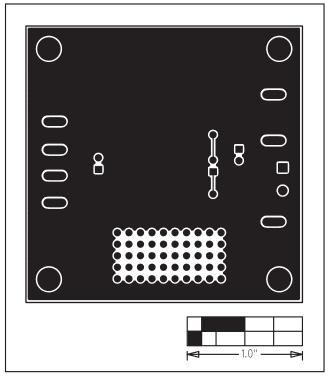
MAX13485E EV Kit PCB Layout—Solder Side
